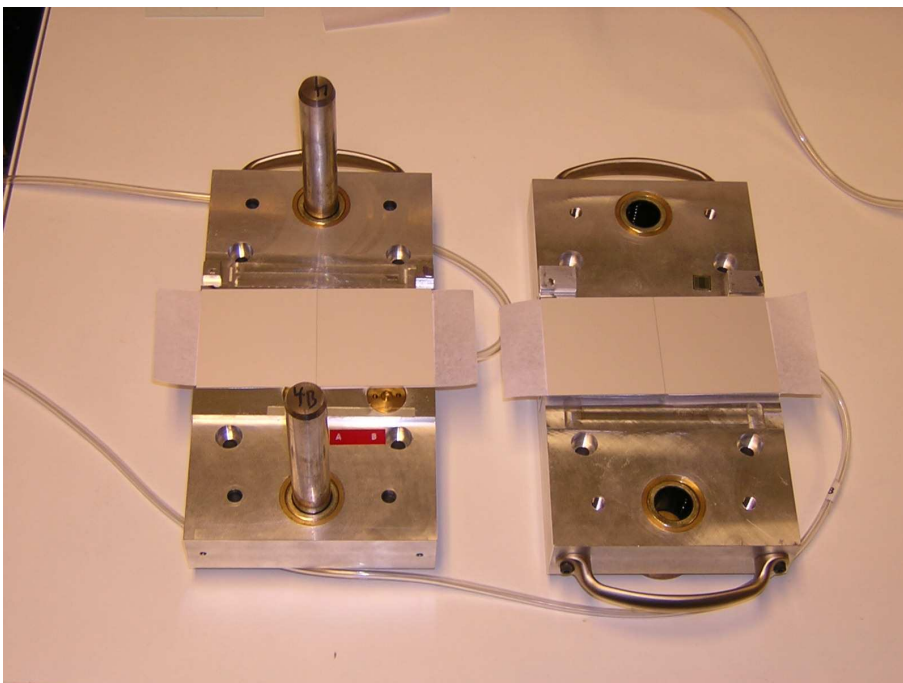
Two pick-up jigs make up a jig set. The backside jig has steering pins for the baseboard.
